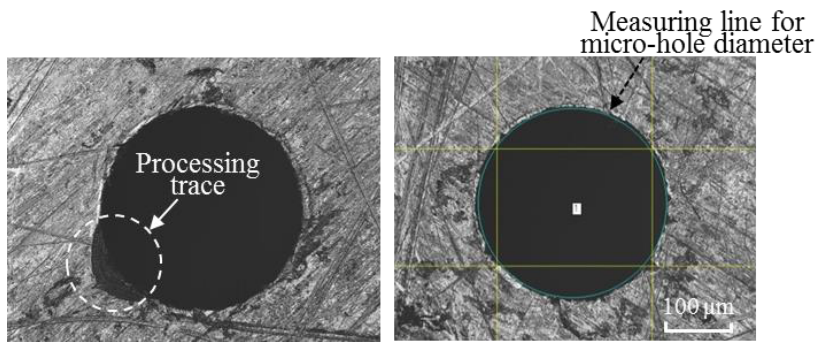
Micro-hole inspection by the shape measuring laser microscope.
